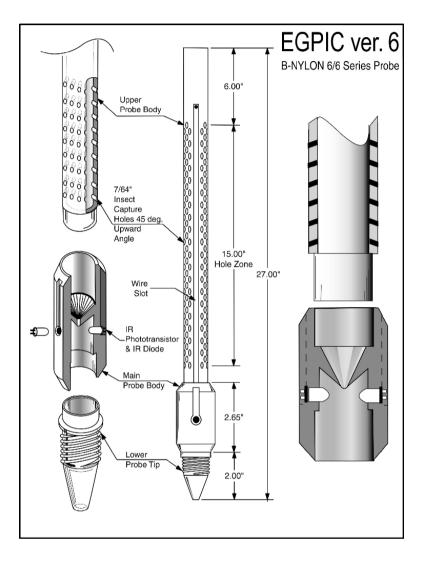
The EGPIC probe to be commercial released, detailing its one piece sensor head and its custom manufactured 210 hole probe body. The electronic "translator" circuit board will be mounted the top no-hole section of the probe body.
